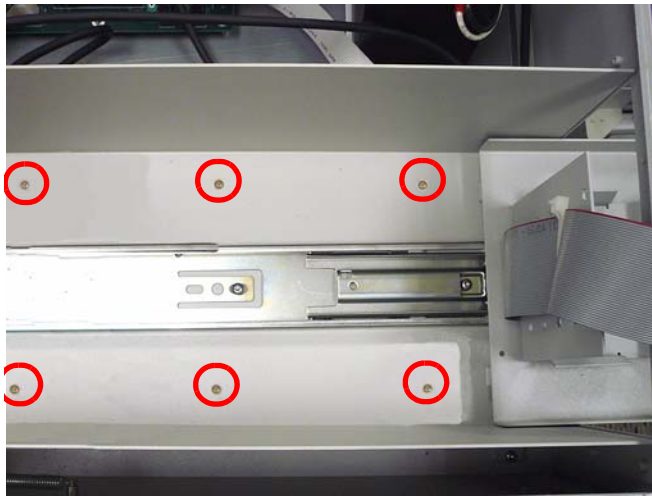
Remove the screws that secure the printer enclosure to the AWS frame
